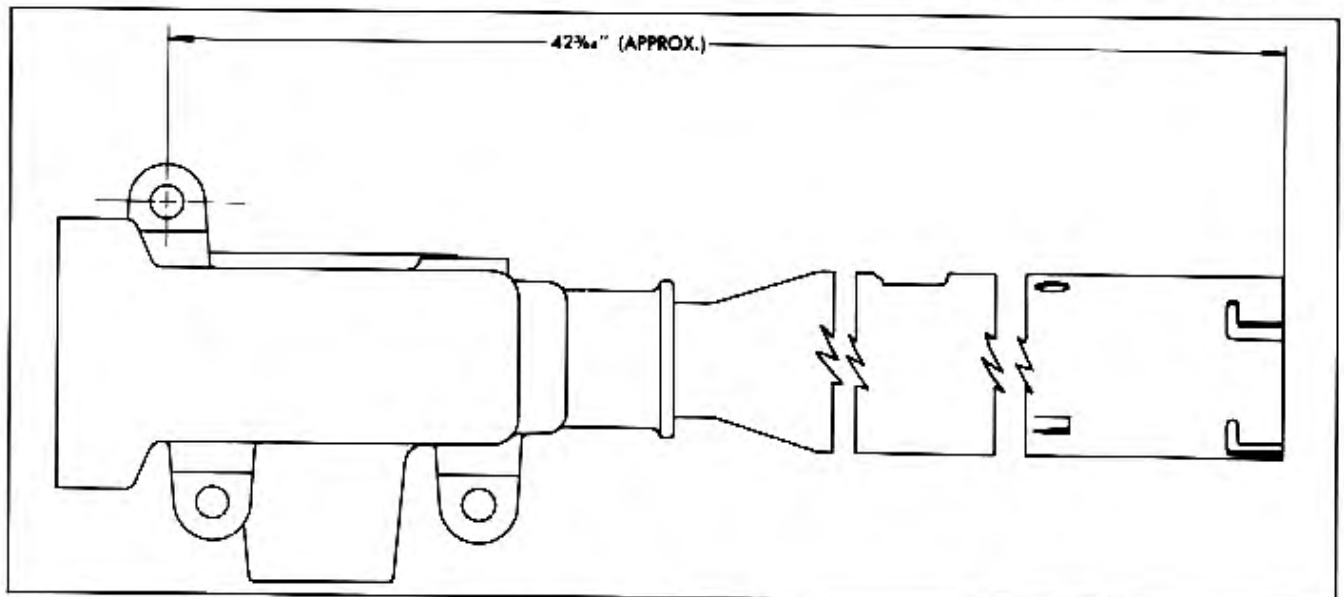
Assembly of Steering Column Housing to Steering Gear Housing
